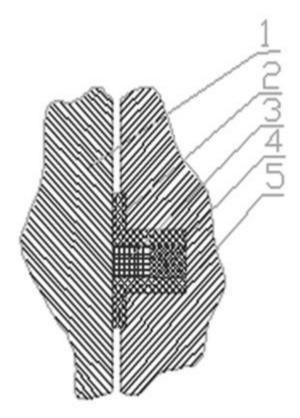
Seals of the lower bearing of the shock-absorber:
